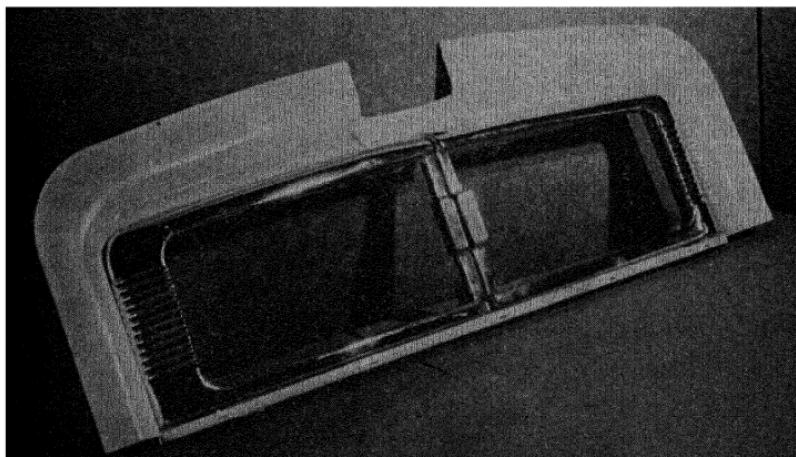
Refrigerator panel injection molded of polystyrene.
